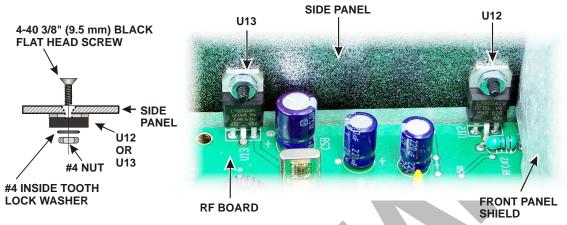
Attaching U12 and U13 to the Right Side Panel.
